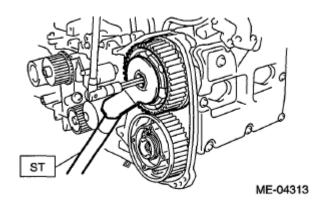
Removing Cam Sprocket Bolt Courtesy of SUBARU OF AMERICA, INC.
